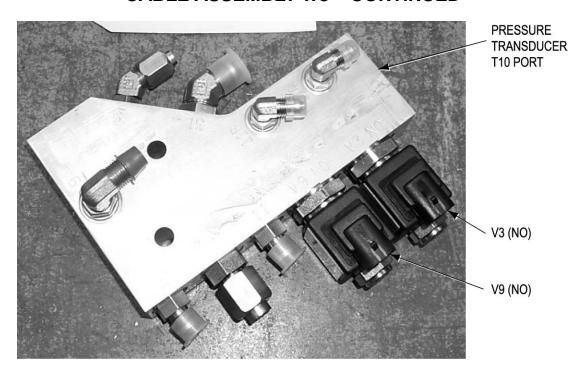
Electrical Connections on Forward Left Manifold Assembly
